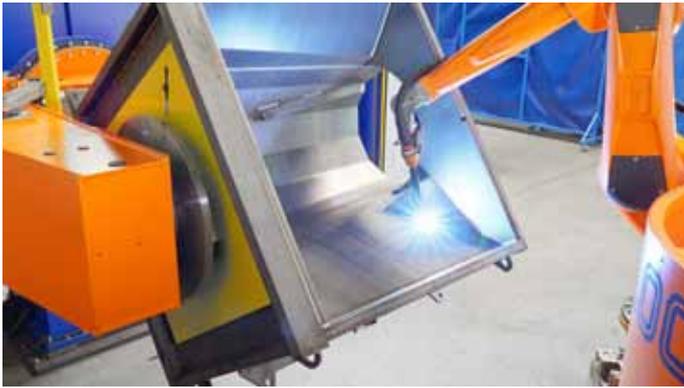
The CLOOS welding robot reaches more than 80 percent of the welds on the complex workpiece.
